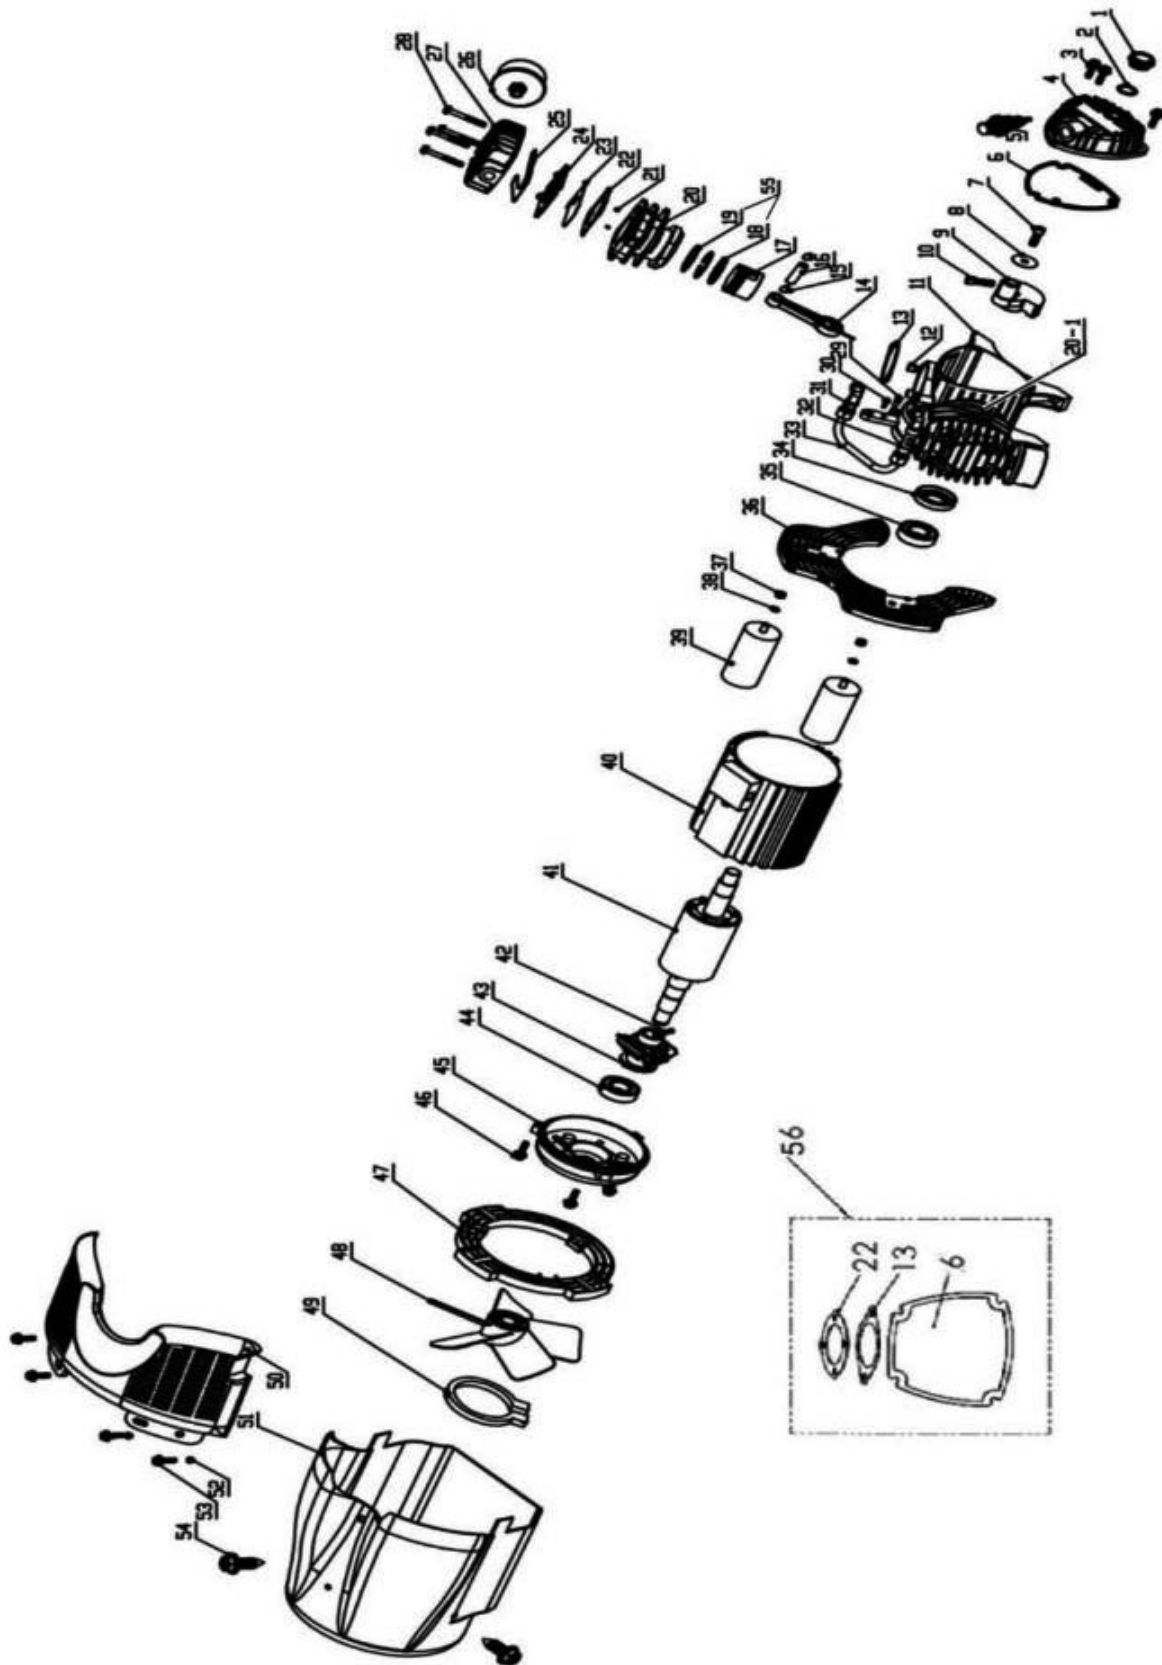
Spare parts drawing 2 - Compressor MOBILBOY 421/50 AC
